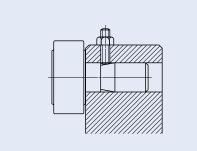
Mounting example of Easy Mounting Type Cam Follower
